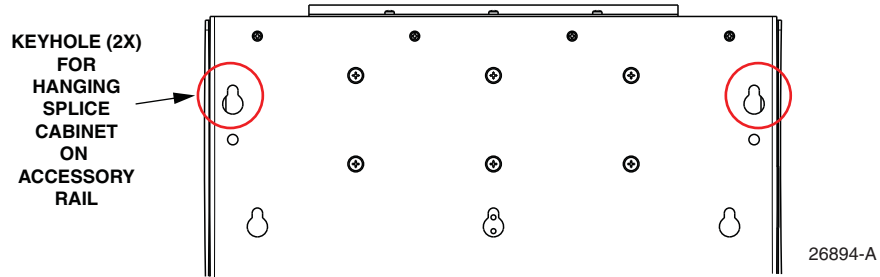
Key Hole Location on Back Interior Wall of Splice Cabinet
